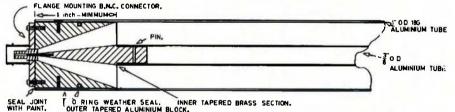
Assembly of BNC Flange Mounting Connector to Aluminium Tube.
